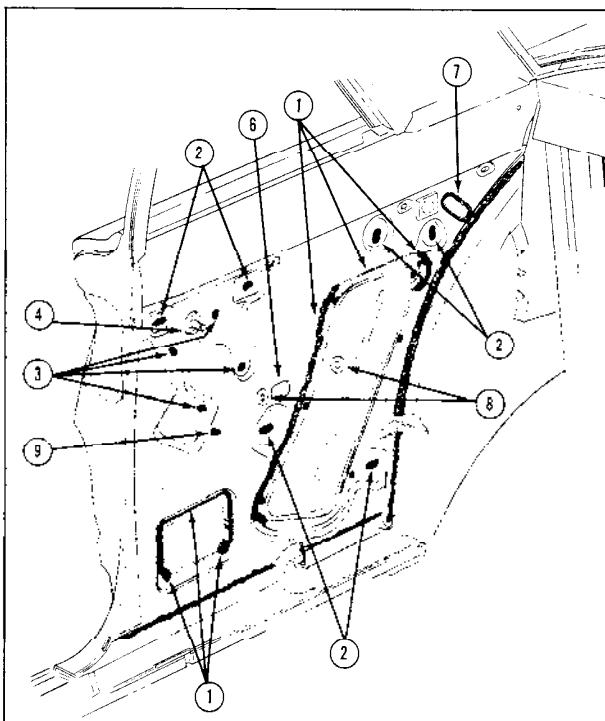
Rear Quarter Inner Panel Sealing "17" and "27" Styles
